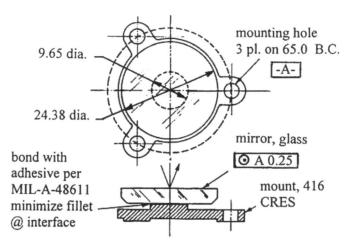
A typical bonded first surface mirror assembly. Dimensions are in millimeters. (Adapted from a U.S. Army drawing.)
